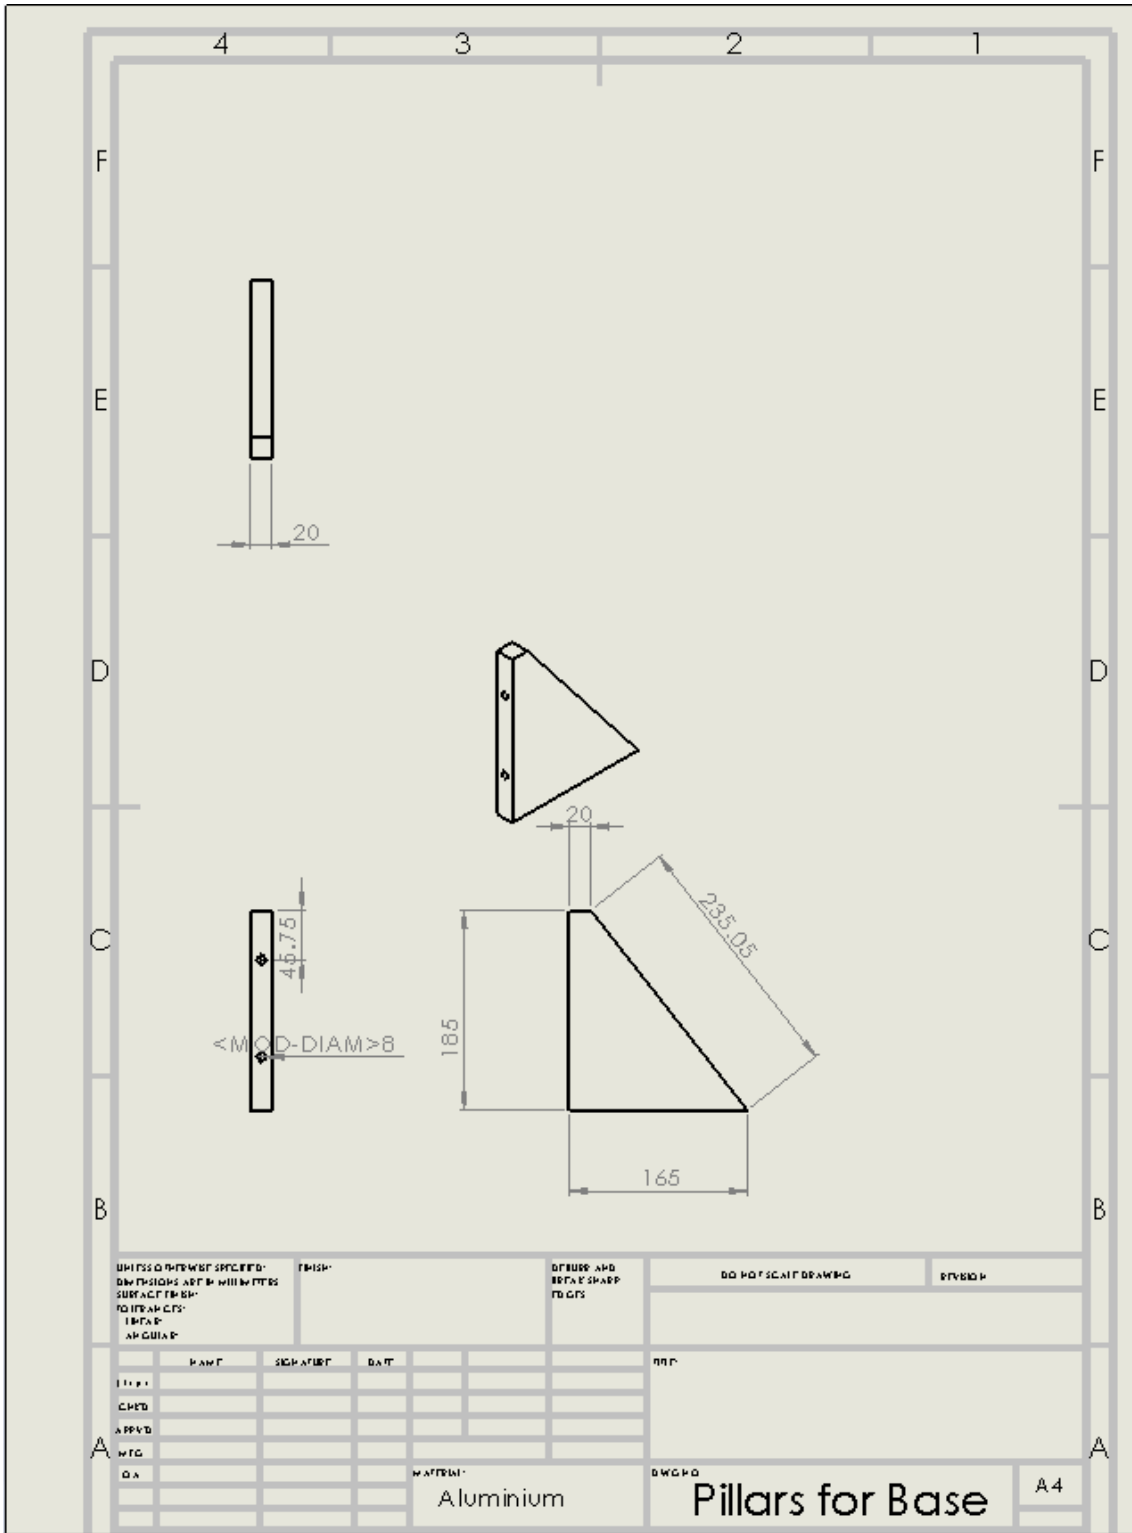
Engineering drawing for the aluminum pillars. (Drawing made on SolidWorks)
